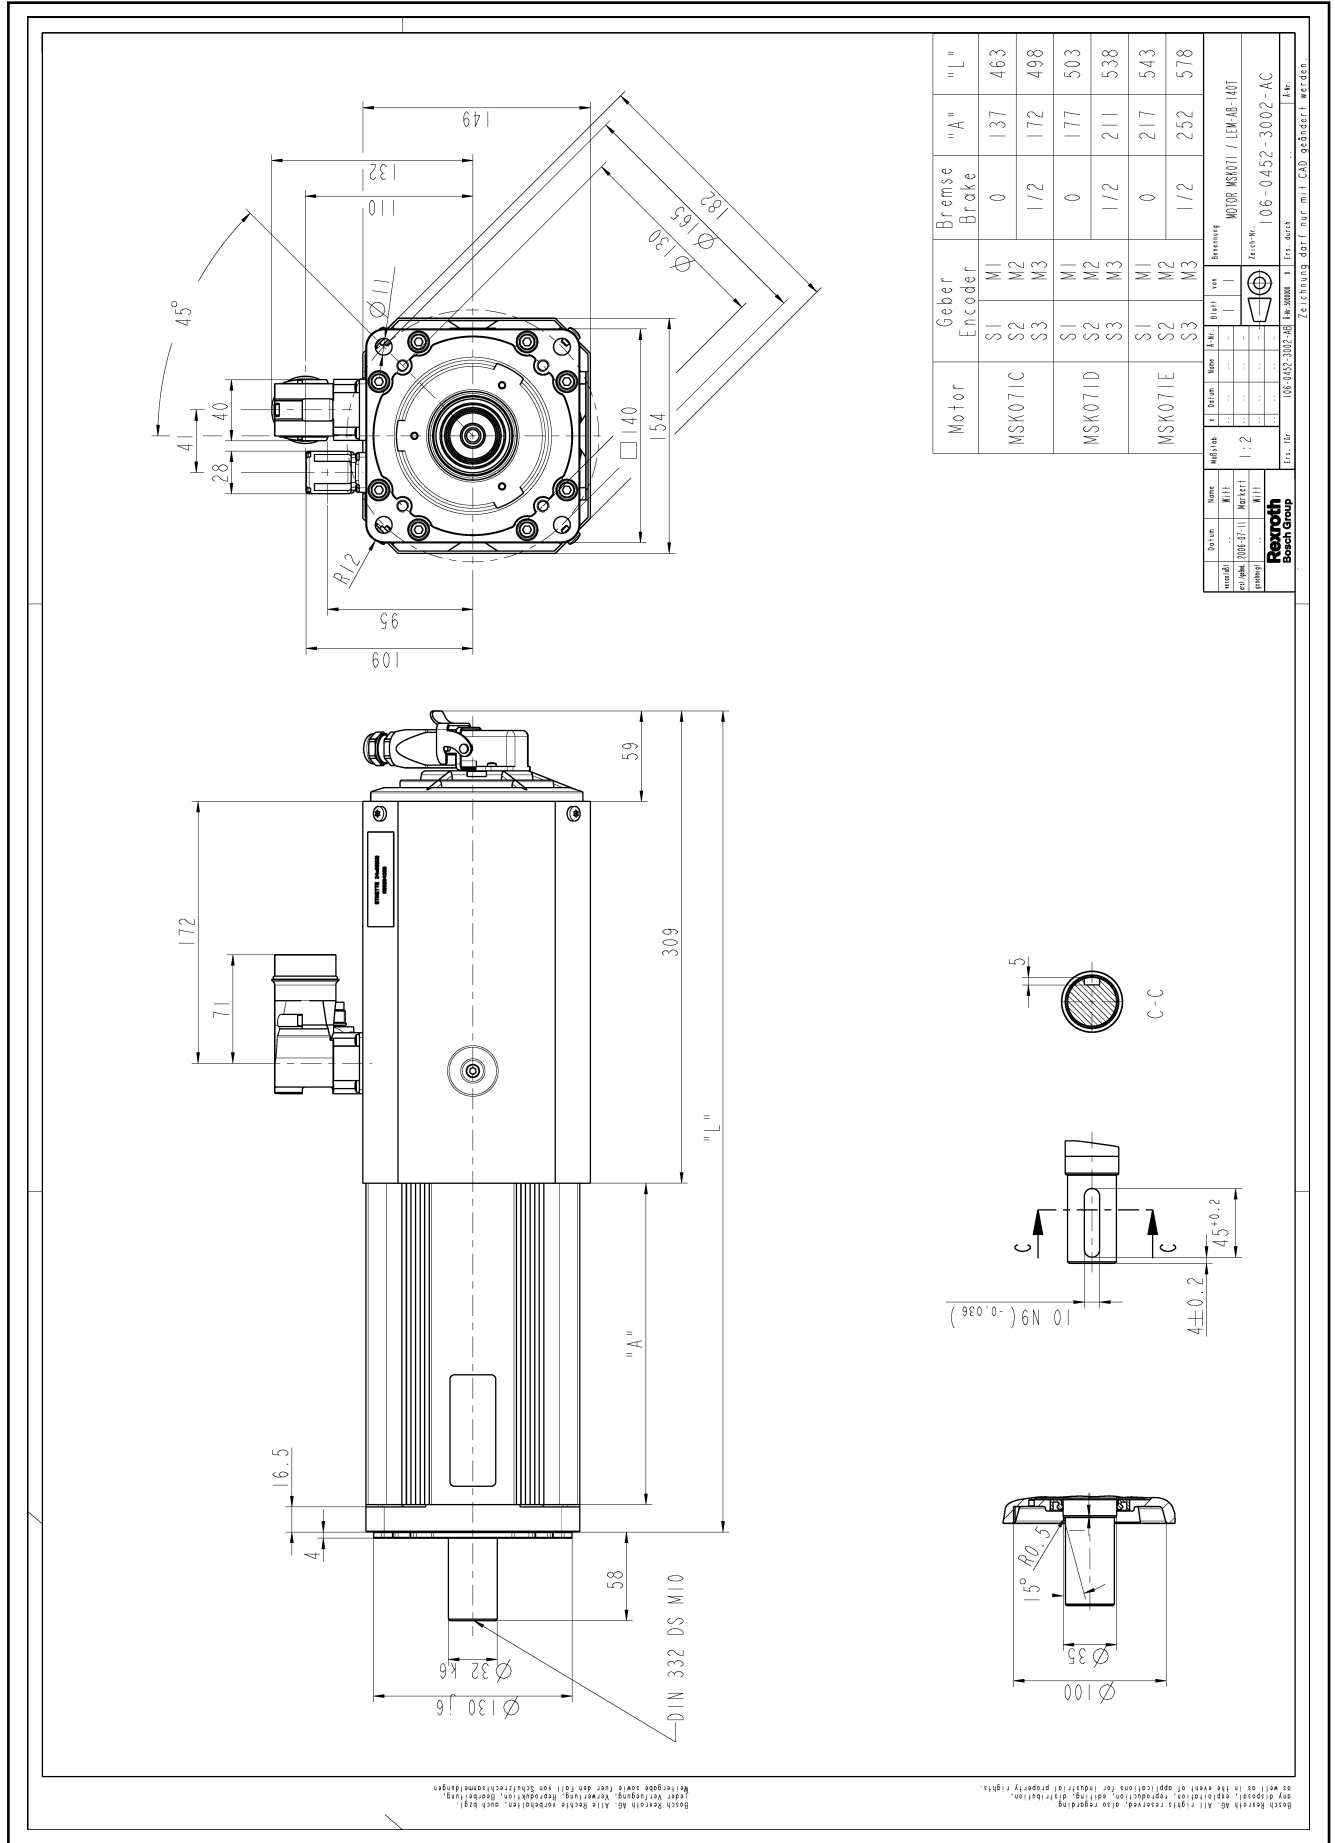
Dimension sheet MSK071 with axial fan unit
